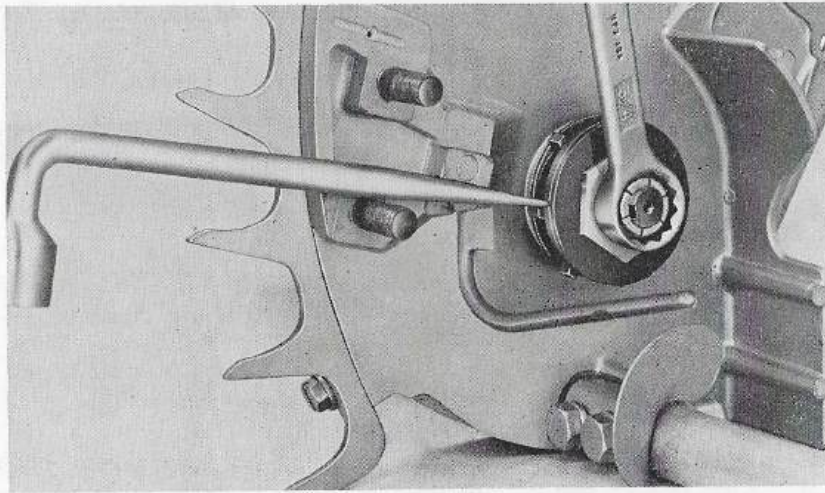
Blocking Chain-Sprocket to Tighten Locknut
